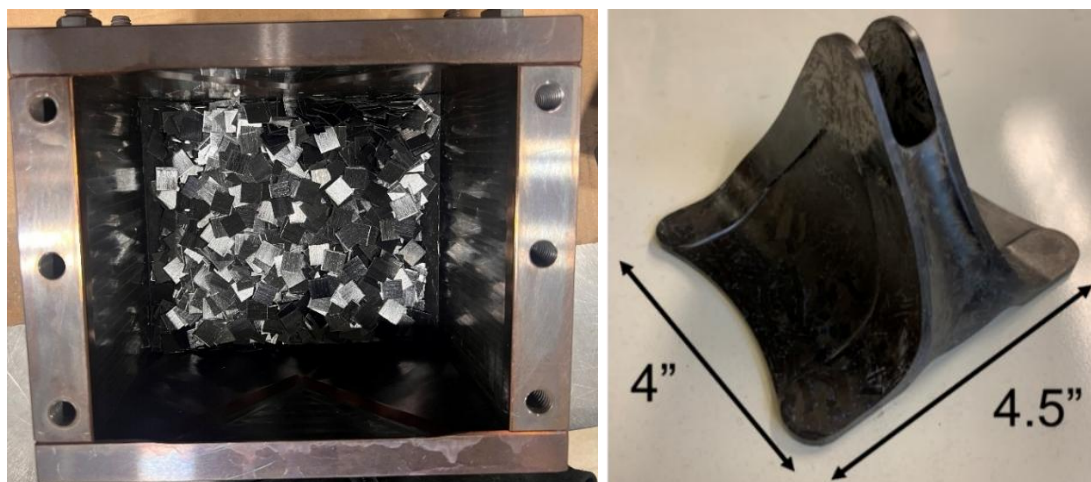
Charge of Platelets in Compression Mold (Left) and Molded DFC Bracket (Right)
